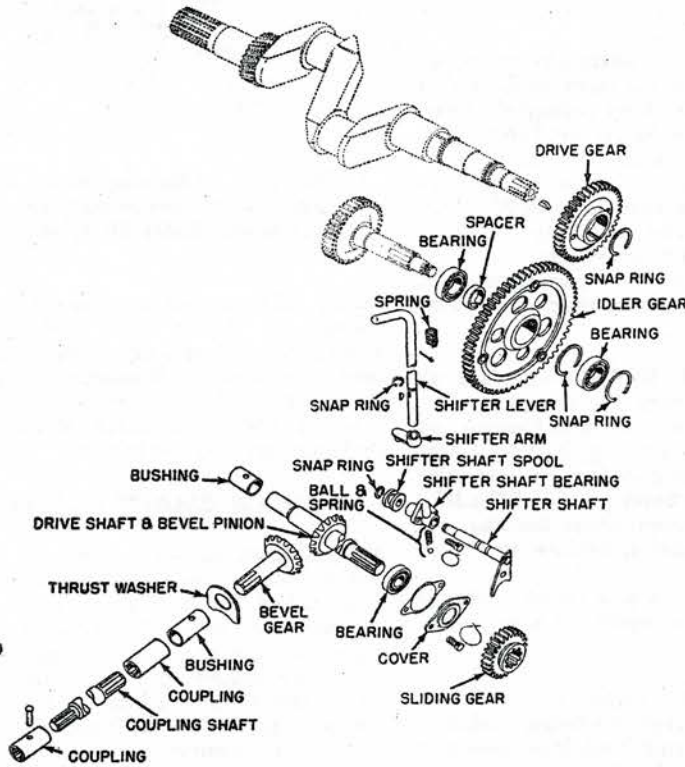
C Exploded view of Model 60 engine-driven power shaft driving and shifting mechanism. Model 50 is similar
